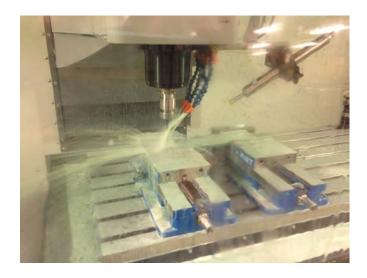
Circular Engravings being cut into Grab Bar Securement Plate
